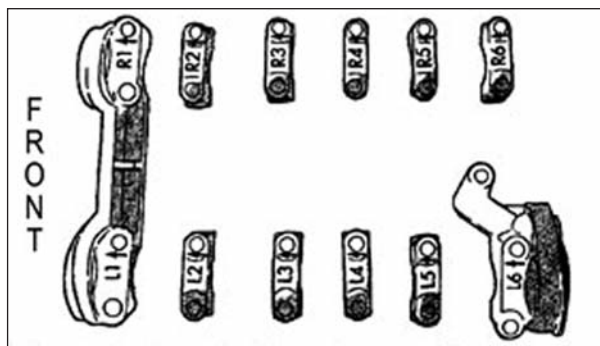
Remove cylinder head valve cover on Chrysler 2.0L and 2.4L engines, then remove L2 cam bearing cap.
